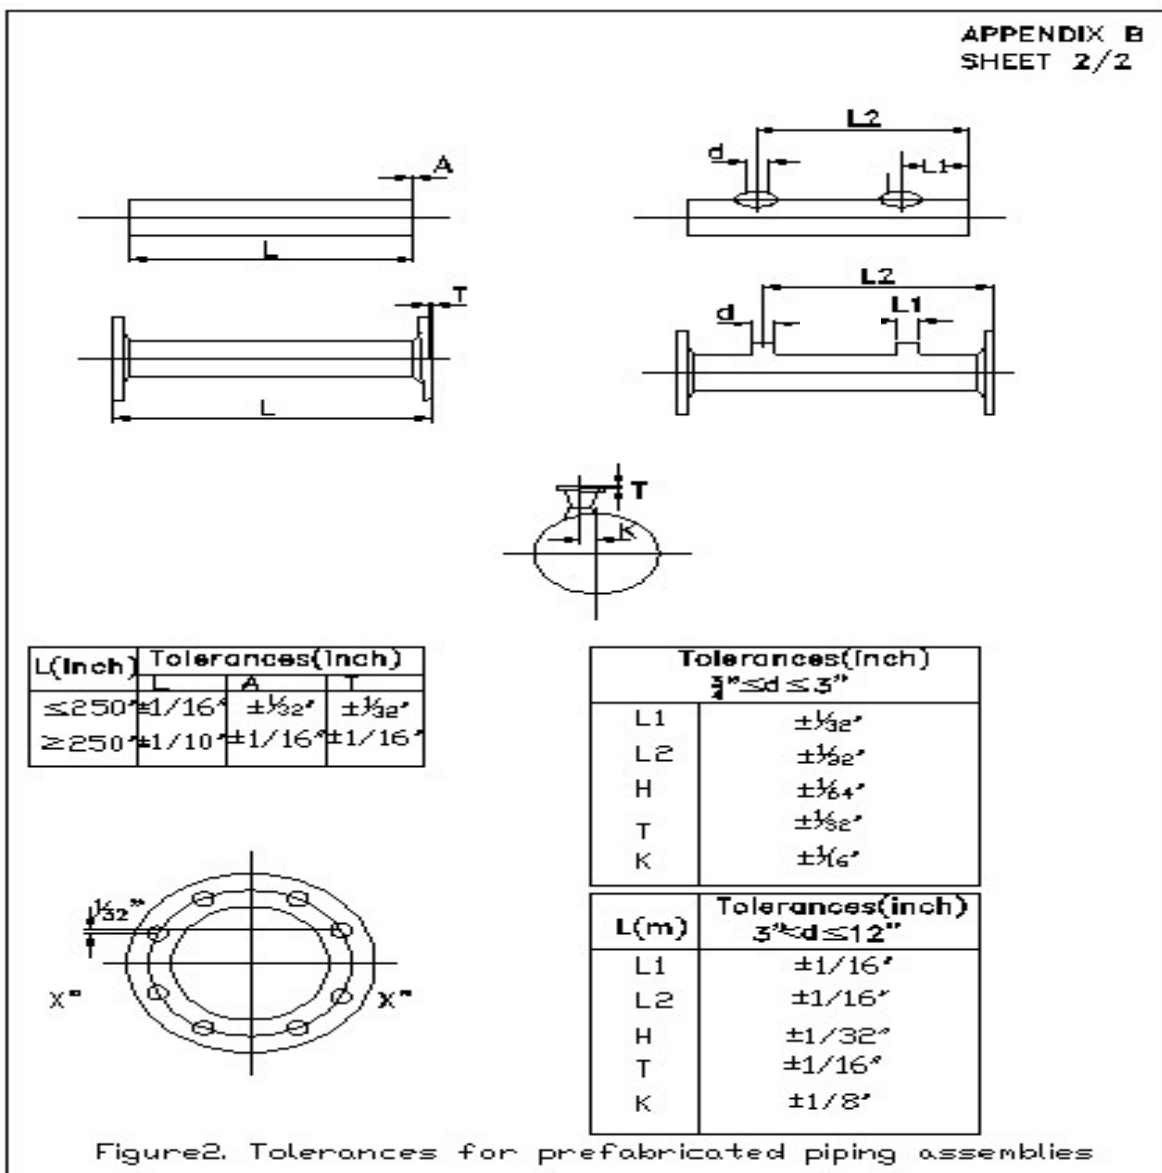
Tolerances for prefabricated piping assemblies
